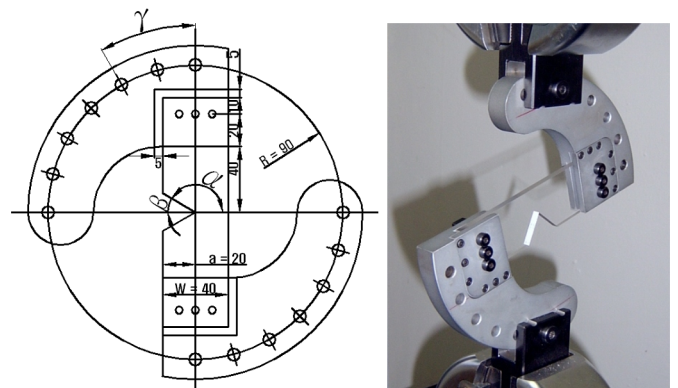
Photograph and configuration of the loading fixture with a V-notch specimen.
